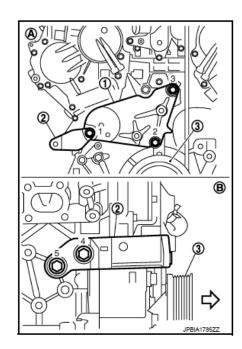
Power Steering Oil Pump Bracket And Idler Pulley Bracket Bolt Tightening
